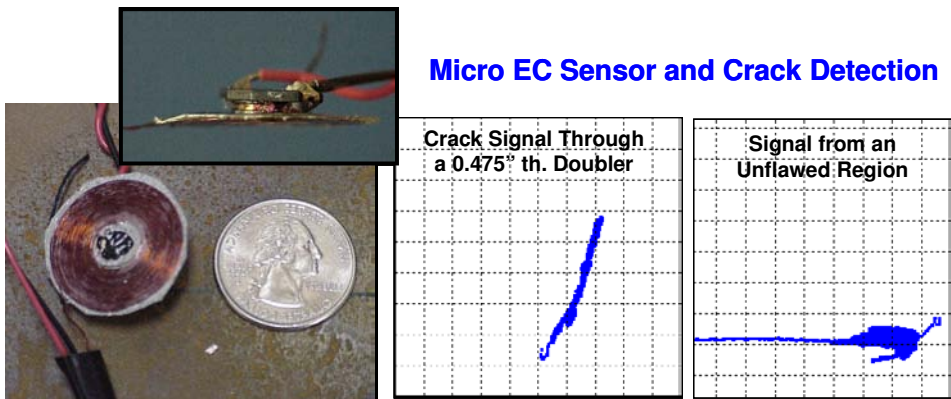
Sandia Pancake EC Sensor and Large Signals Showing Crack Detection Through Thick Composite Doublers.
